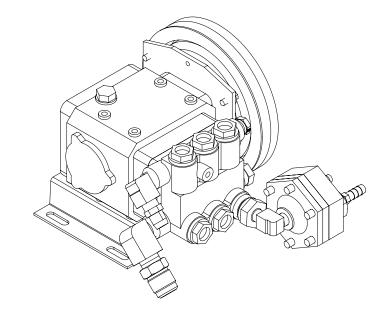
Pump Assembly 610-007-720 Rev. C
